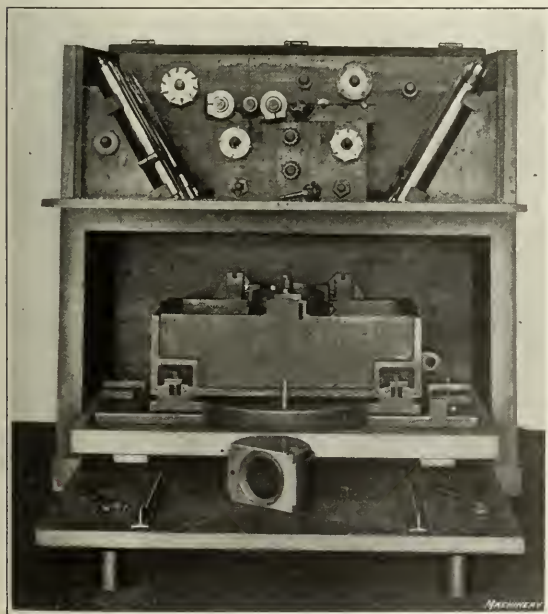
Portable Cabinet containing Jig and the Necessary Cutting Tools
